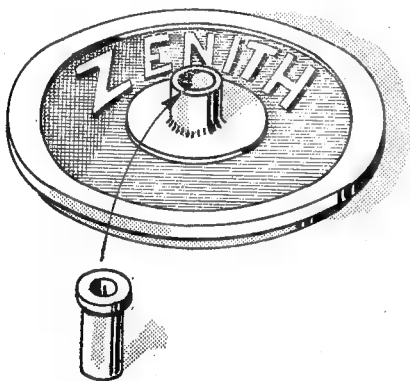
Fitting a small bush to the carburettor-float chamber cover
